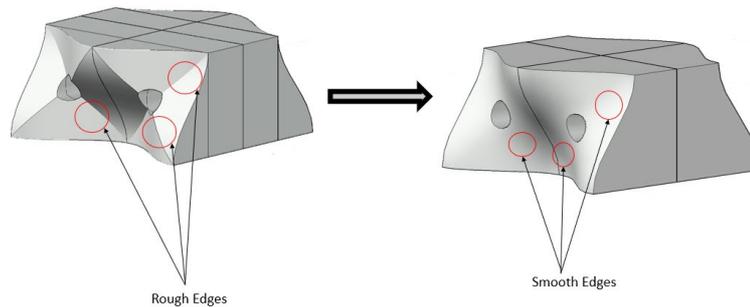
Piecewise linear and piecewise continuous surfaces of the block.
